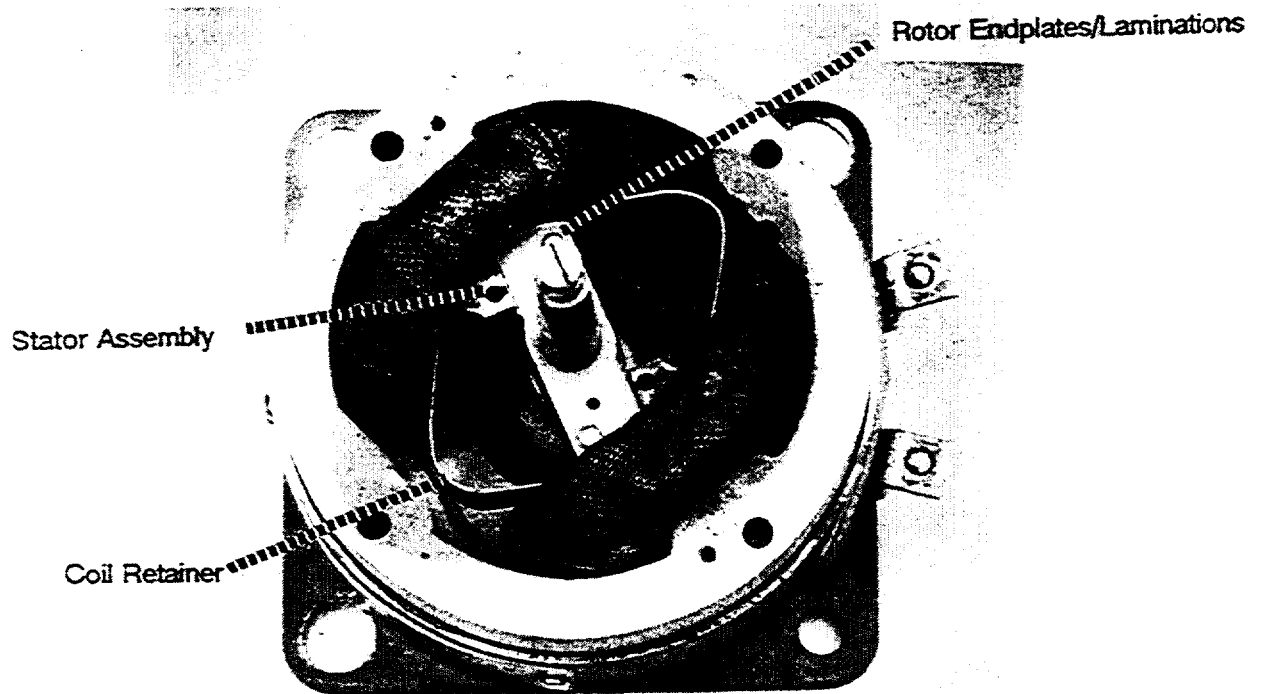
Stop Ring and Return Springs Removed – Non-Latching Relay
